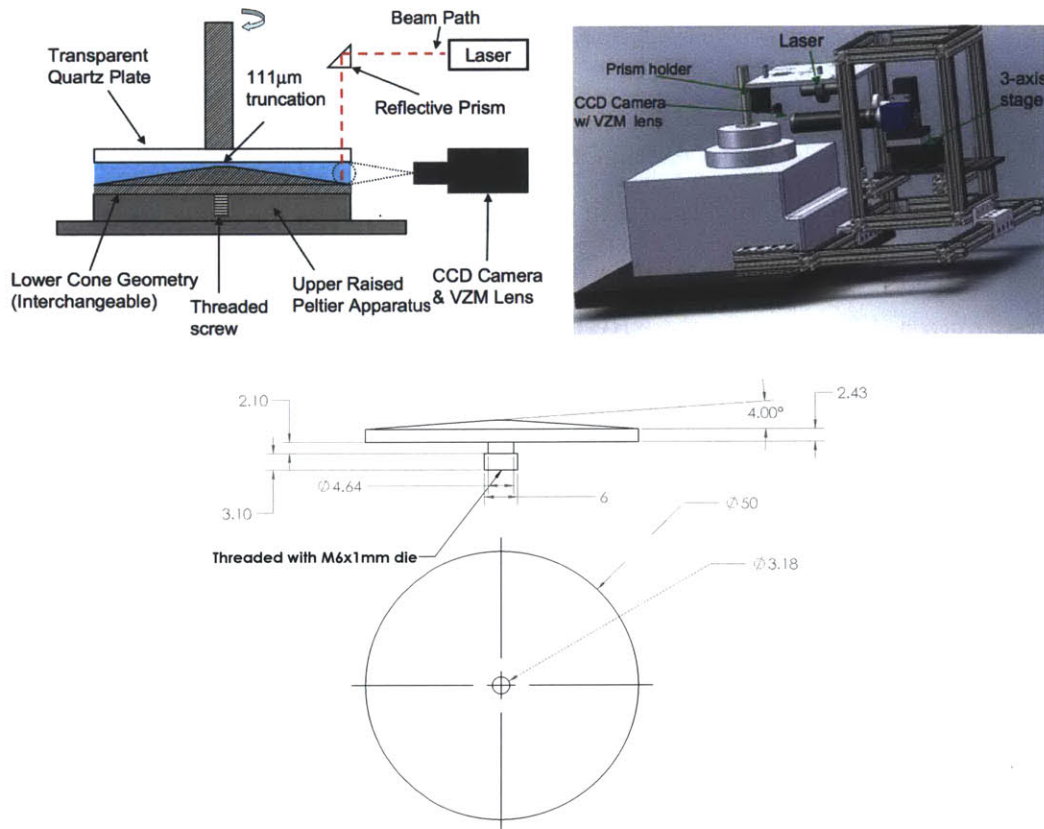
Schematic diagram (upper left) and 3D model (upper right, rendered in Solidworks) of the RheoPIV v1 apparatus. The lower image is an engineering drawing of a 25 mm lower cone geometry (dimensions in millimeters).
